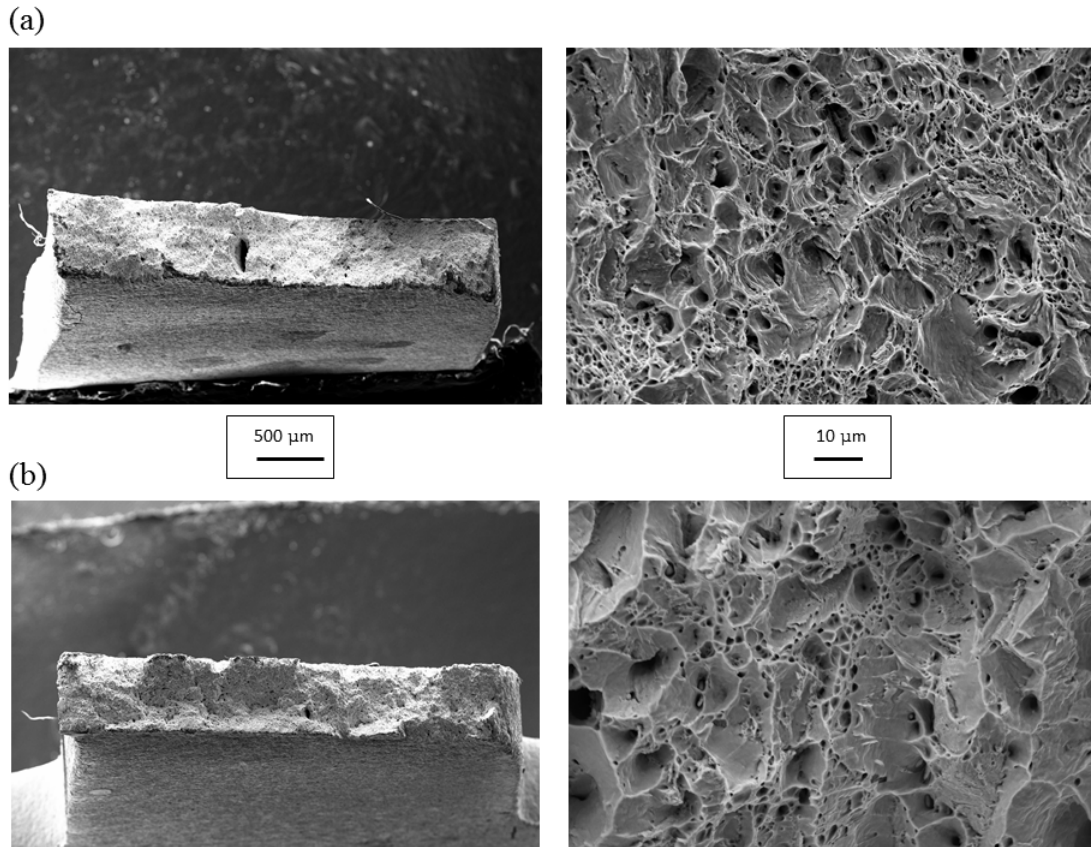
Fractography of 1018 steel fractured in (a) air at 150°C and (b) molten lead-bismuth eutectic at 150°C showing similar failure.
